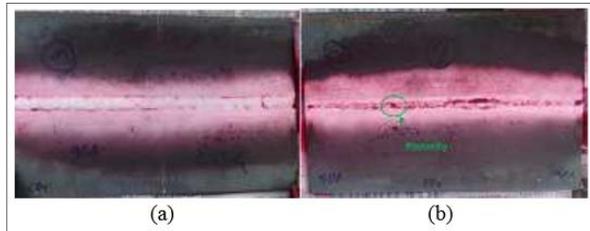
The undercutting and porosity occurs on the weld face (a) and Weld root (b) for CO₂ sample.
